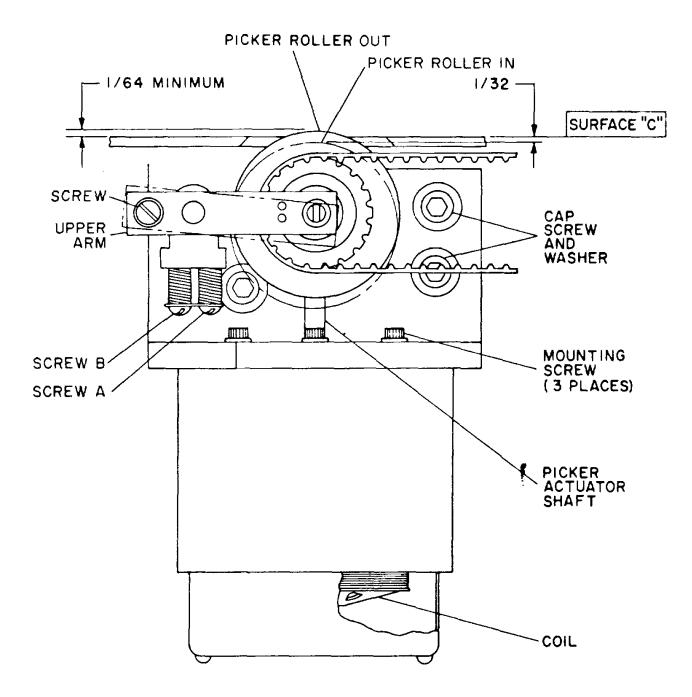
Picker assembly. EL5895-422-1 5/1 -1 0
